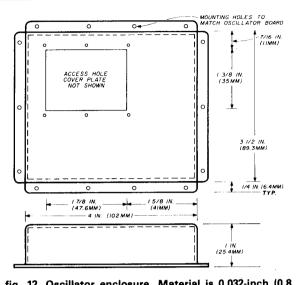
Oscillator enclosure. Material is 0.032-inch (0.8 mm) aluminum.
